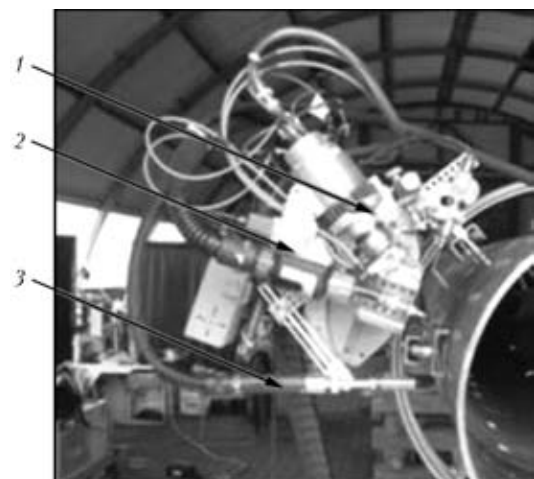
Welding head with hybrid equipment for root pass welding and arc torch for filler pass welding: 1 – laser optics; 2 – hybrid arc; 3 – arc torch for filler pass welding
